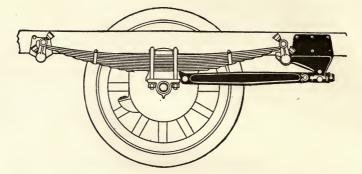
Torque taken on Springs. Driving Thrust taken on Radius Rods.
